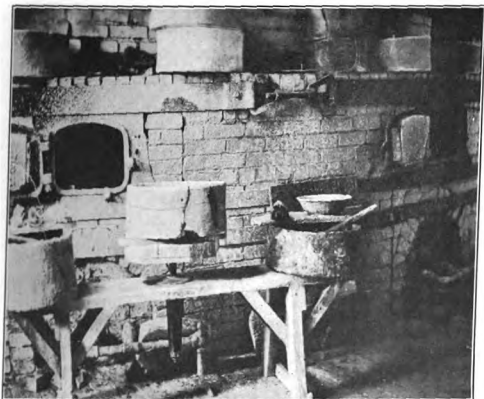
WORK BENCH FOR SAGGER WASHING. NOTE GLAZE ON SPONGES, PAN CONTAINERS, BENCH, FLOOR, AND WALL OF KILN. SAGGER TO BE WASHED ON REVOLVING PEDESTAL IN CENTER.
